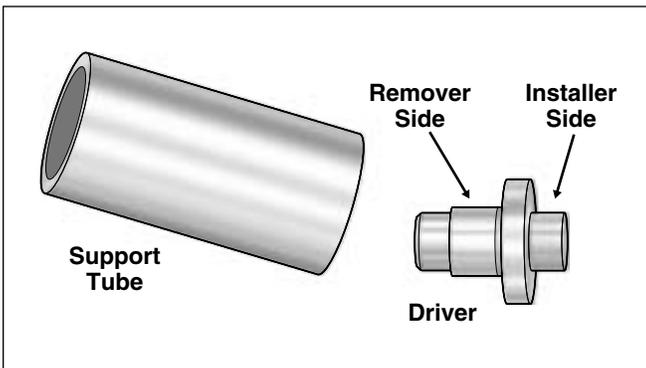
Crankshaft Bushing Remover/Installer (Part No. HD-42315)
